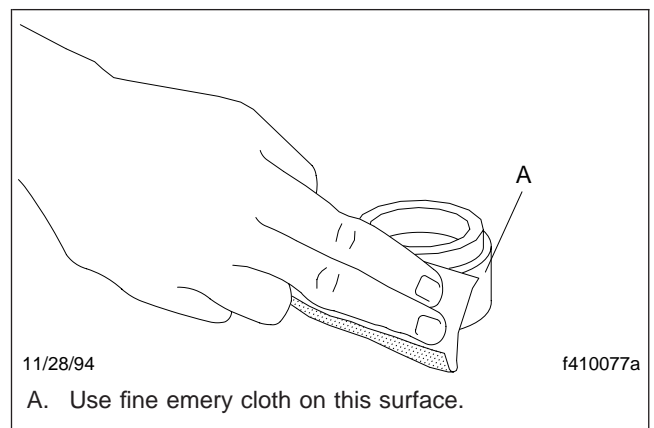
, Smooth a Half-Round End-Yoke U-Joint Bearing Cup
